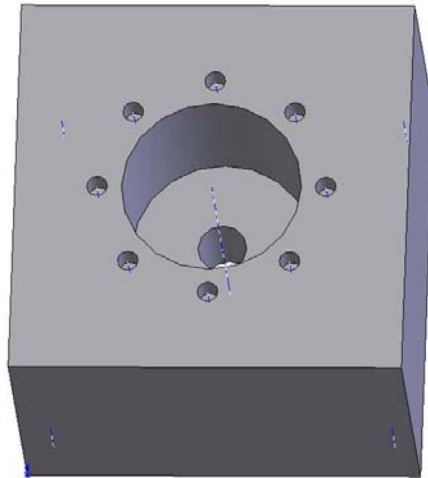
Circular pattern of holes in aluminum block of rotator
